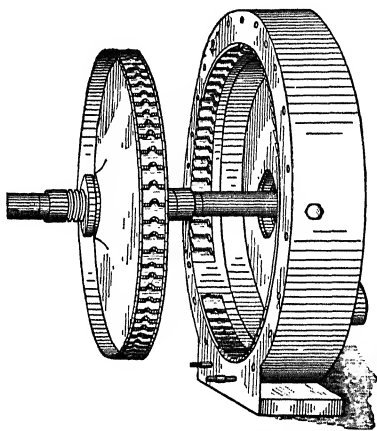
WHEEL AND CASING OF STURTEVANT TURBINE.
